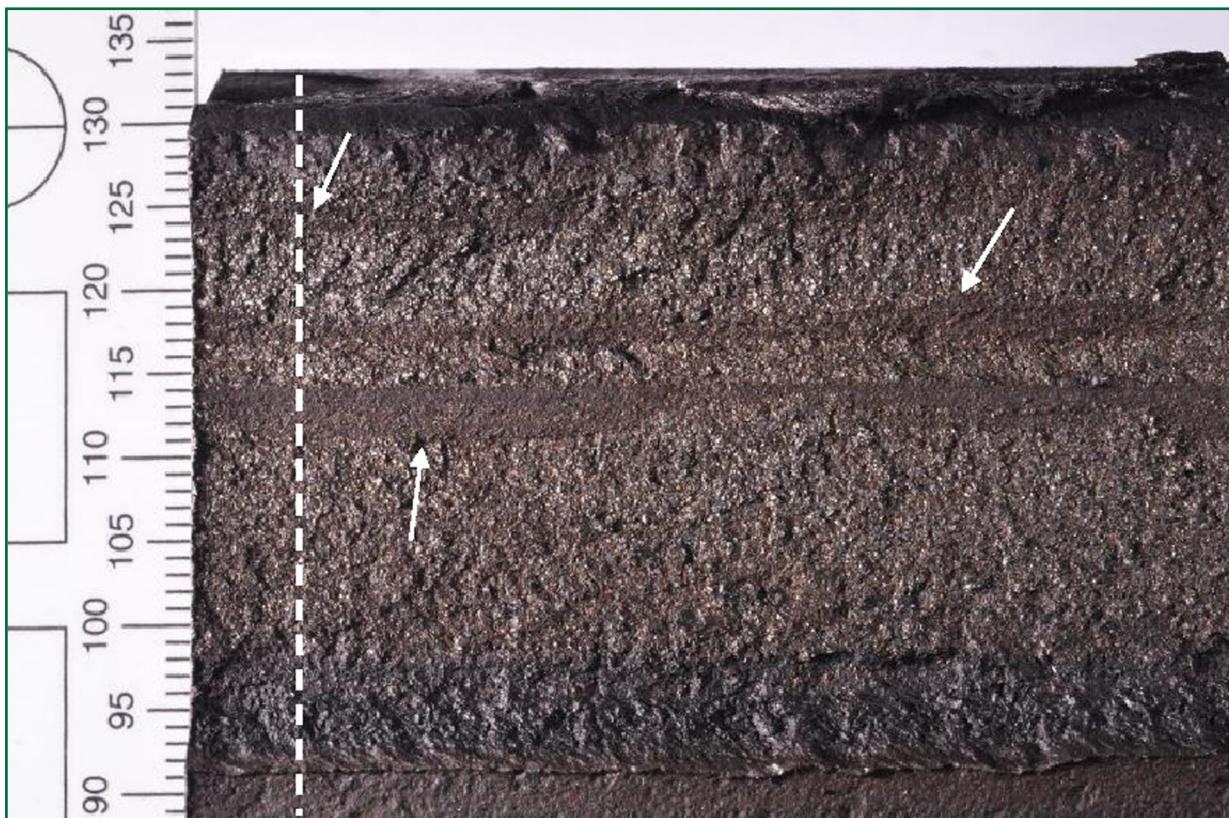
Fracture face of VLS crack showing multiple defects (arrowed) oriented in the rolling direction (image courtesy of Serco Rail Technical Services)
